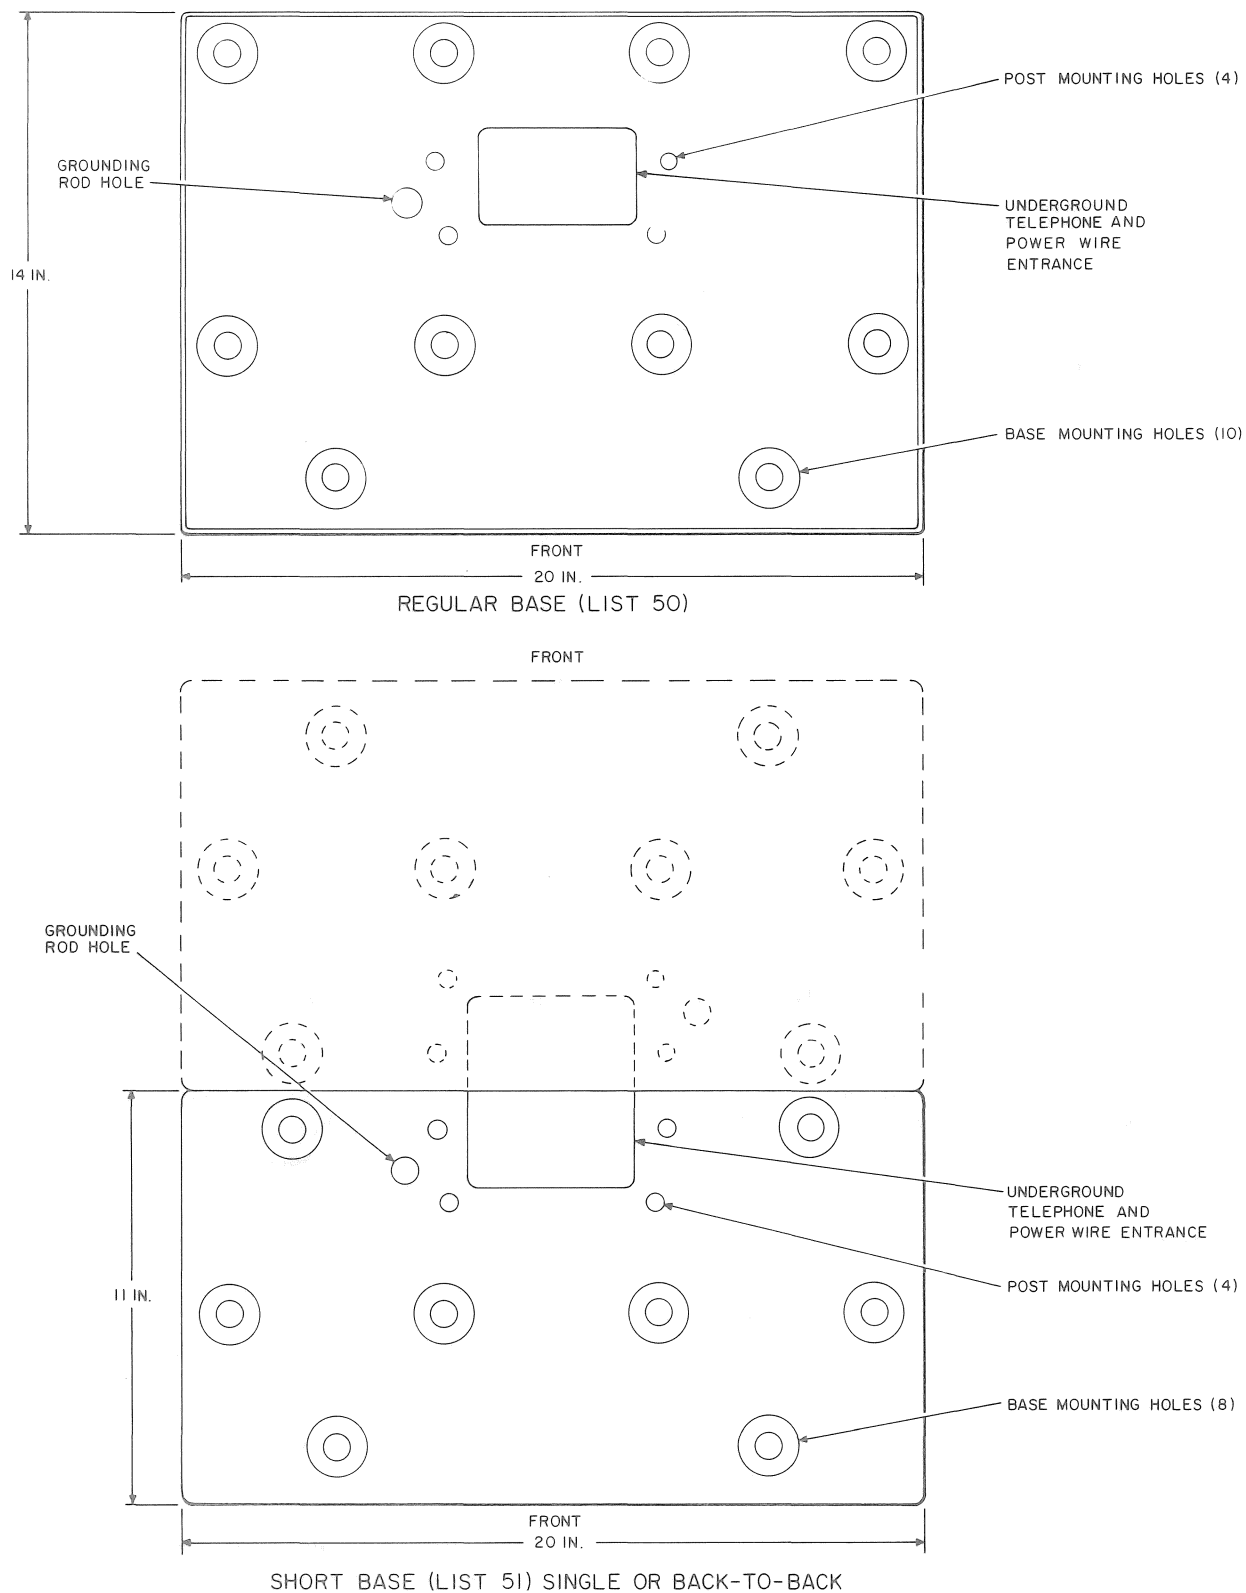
Layout of Holes on List 50 and List 51 Bases, With Cover(s) Removed
